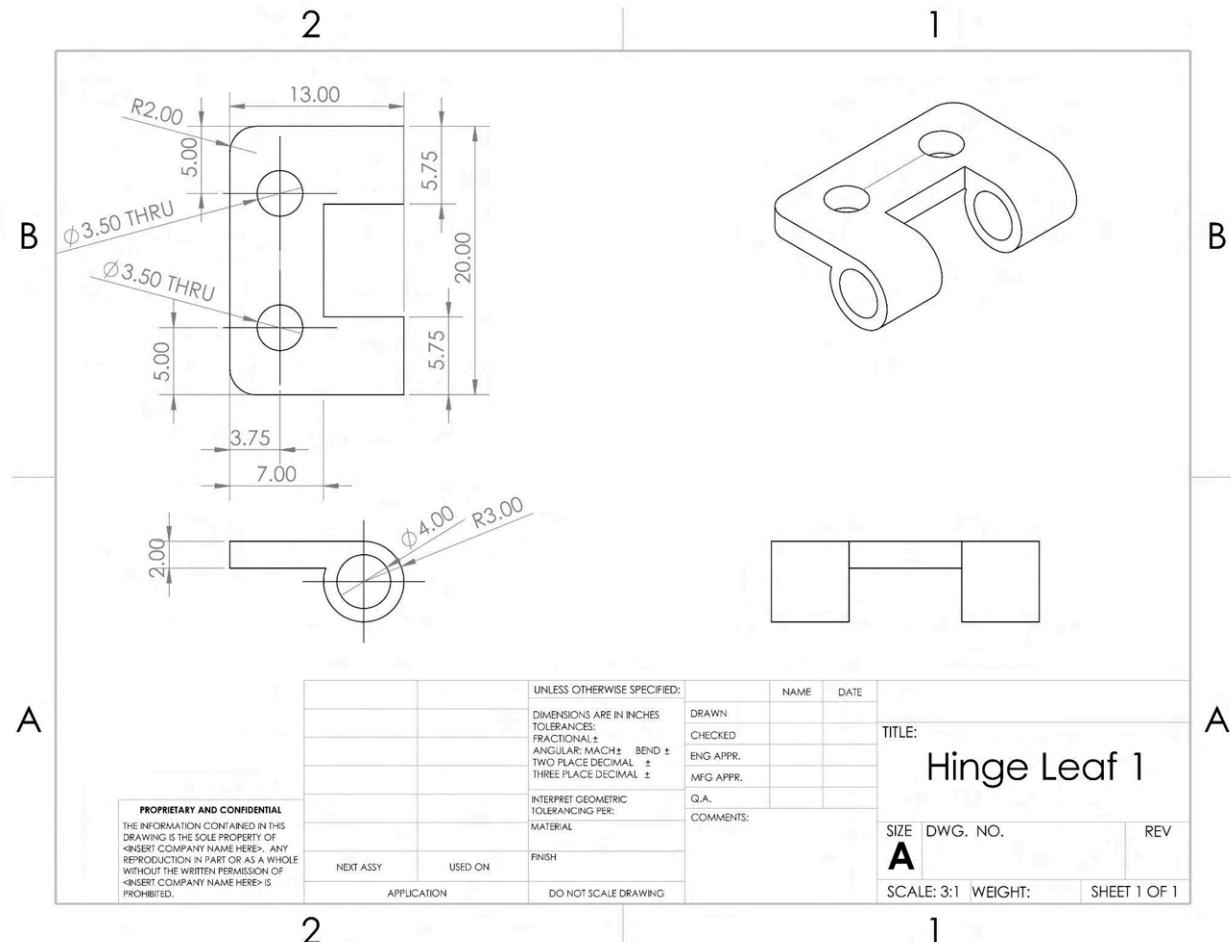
Hinge Leaf 1. Dimensions in mm. (added dimensions)
